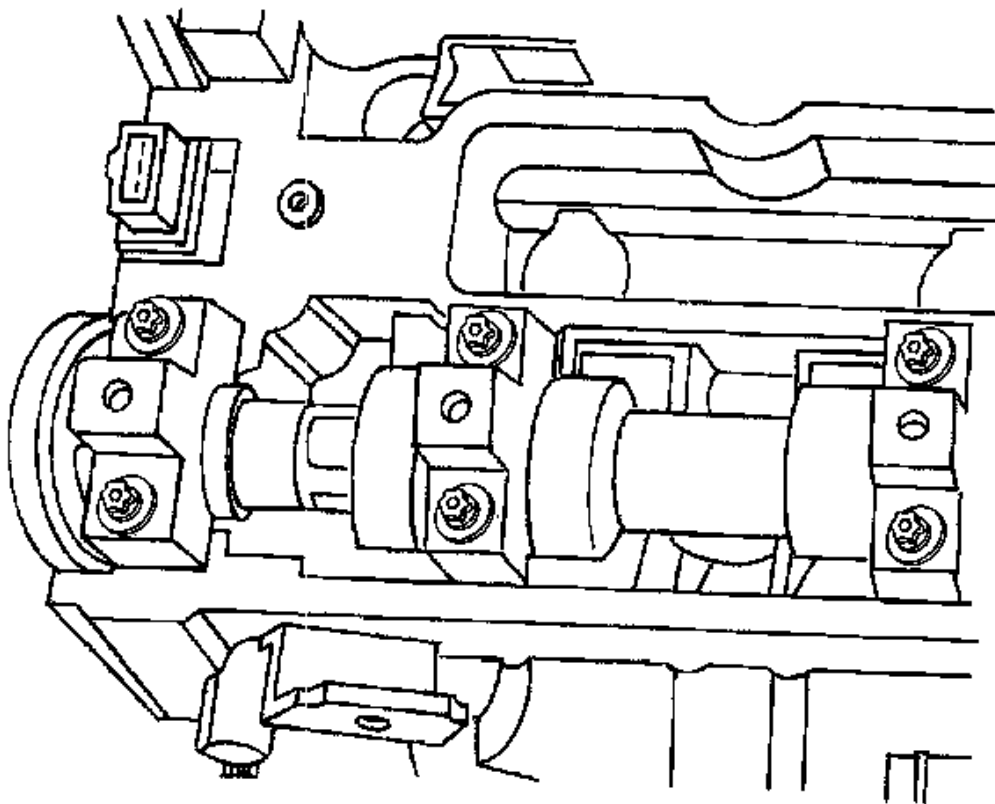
View Of Camshaft Bearing Caps And Bolts
